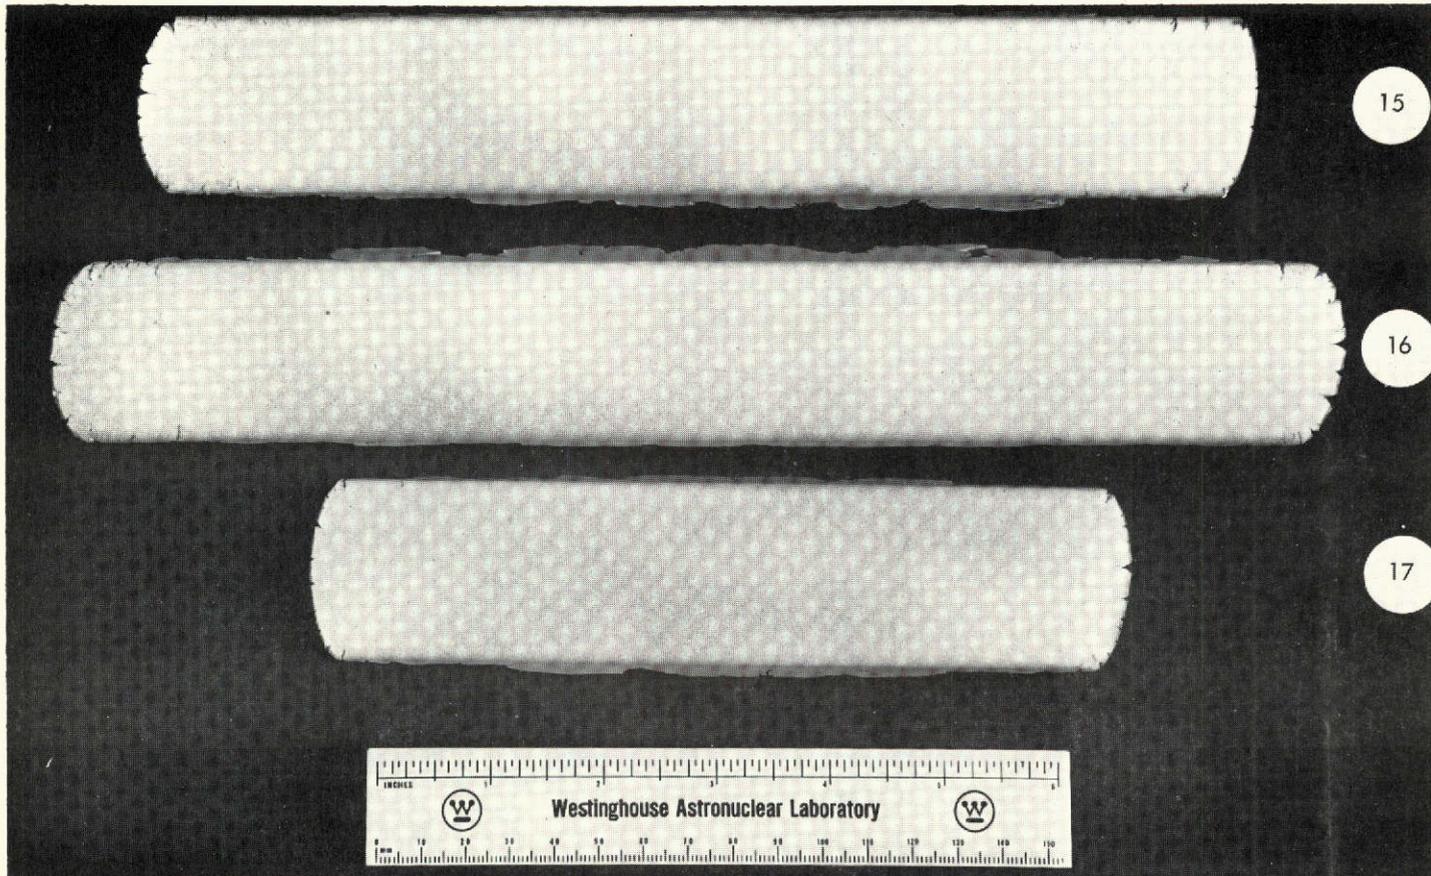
, Part (c). Forgings 15, 16, and 17. These were secondary forged at 1144°K (1600°F). Lesser cracking in comparison to forgings 9 to 14 is attributed to use of a higher forging temperature. The quality of these forgings typifies the wide majority of those prepared on the program. (Dye penetrant used to accentuate cracks).
